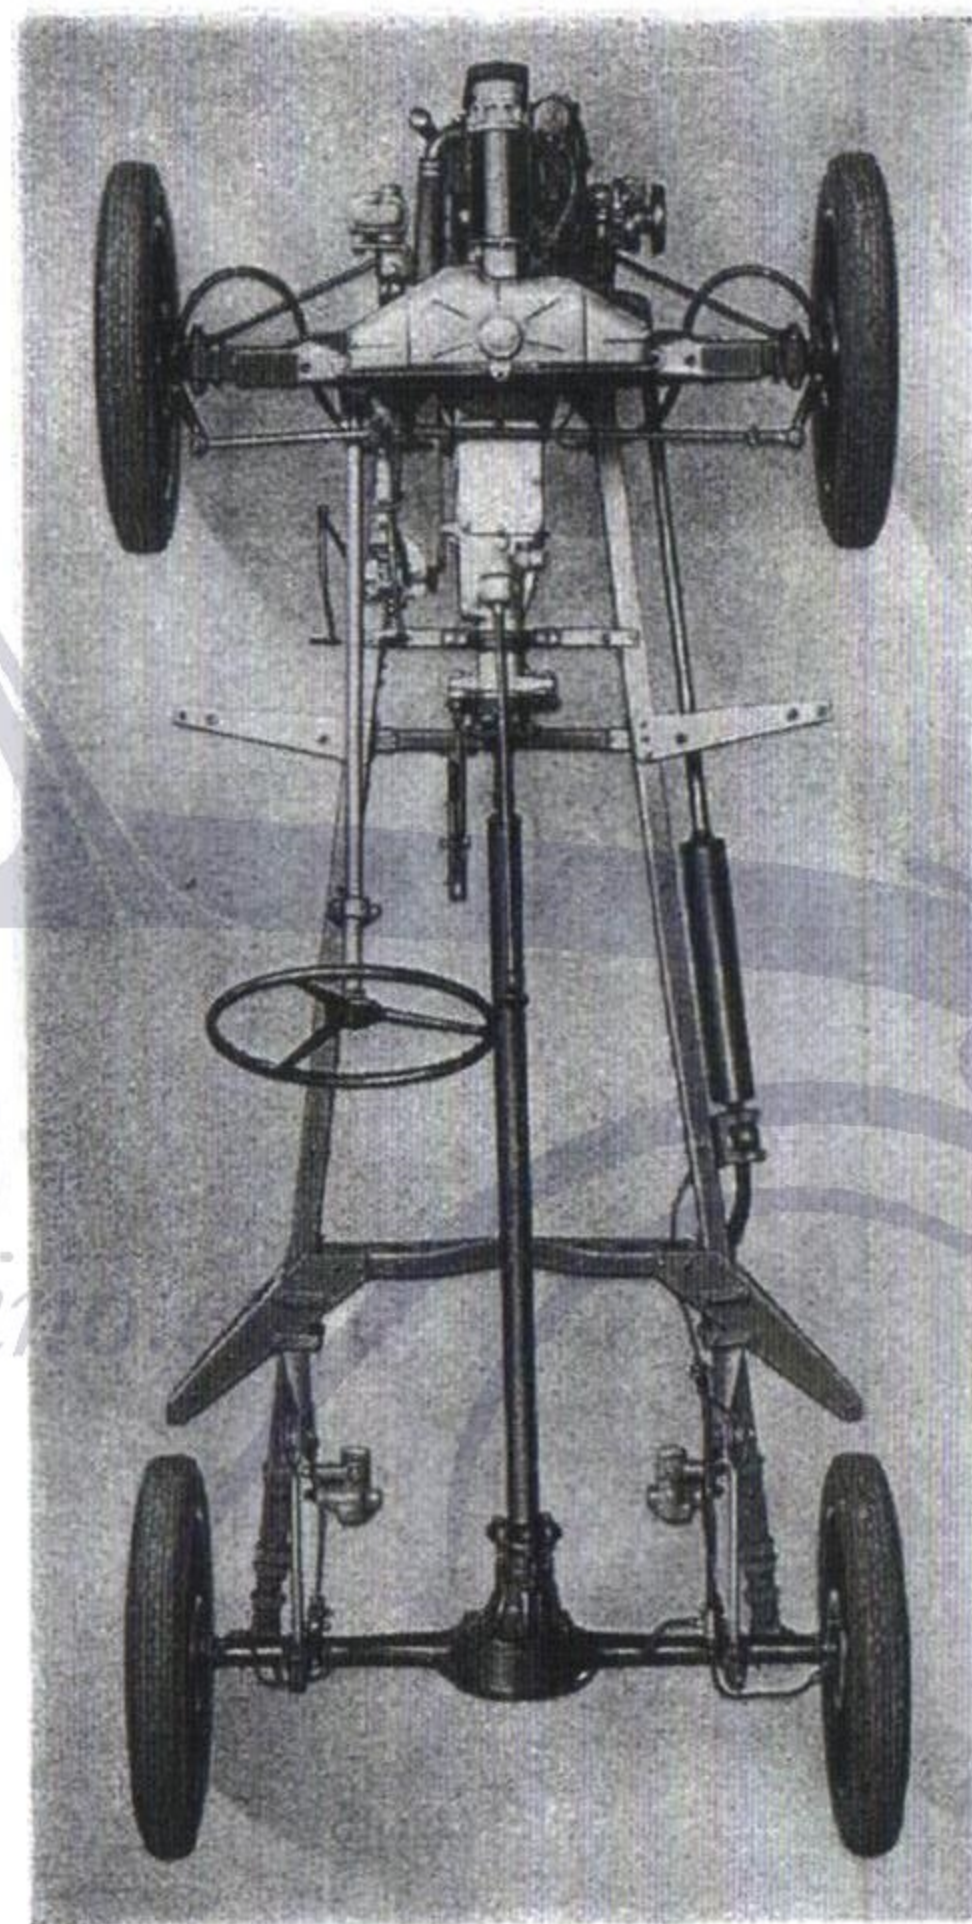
Chassis of the 500 Model, up to No. 046000, viewed from above.
